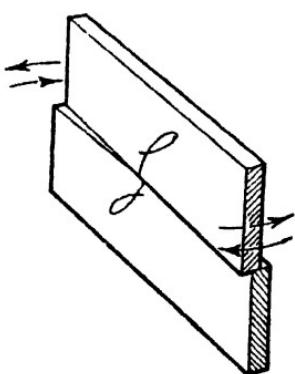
TESTING JOINT BY "SWIVELLING."
